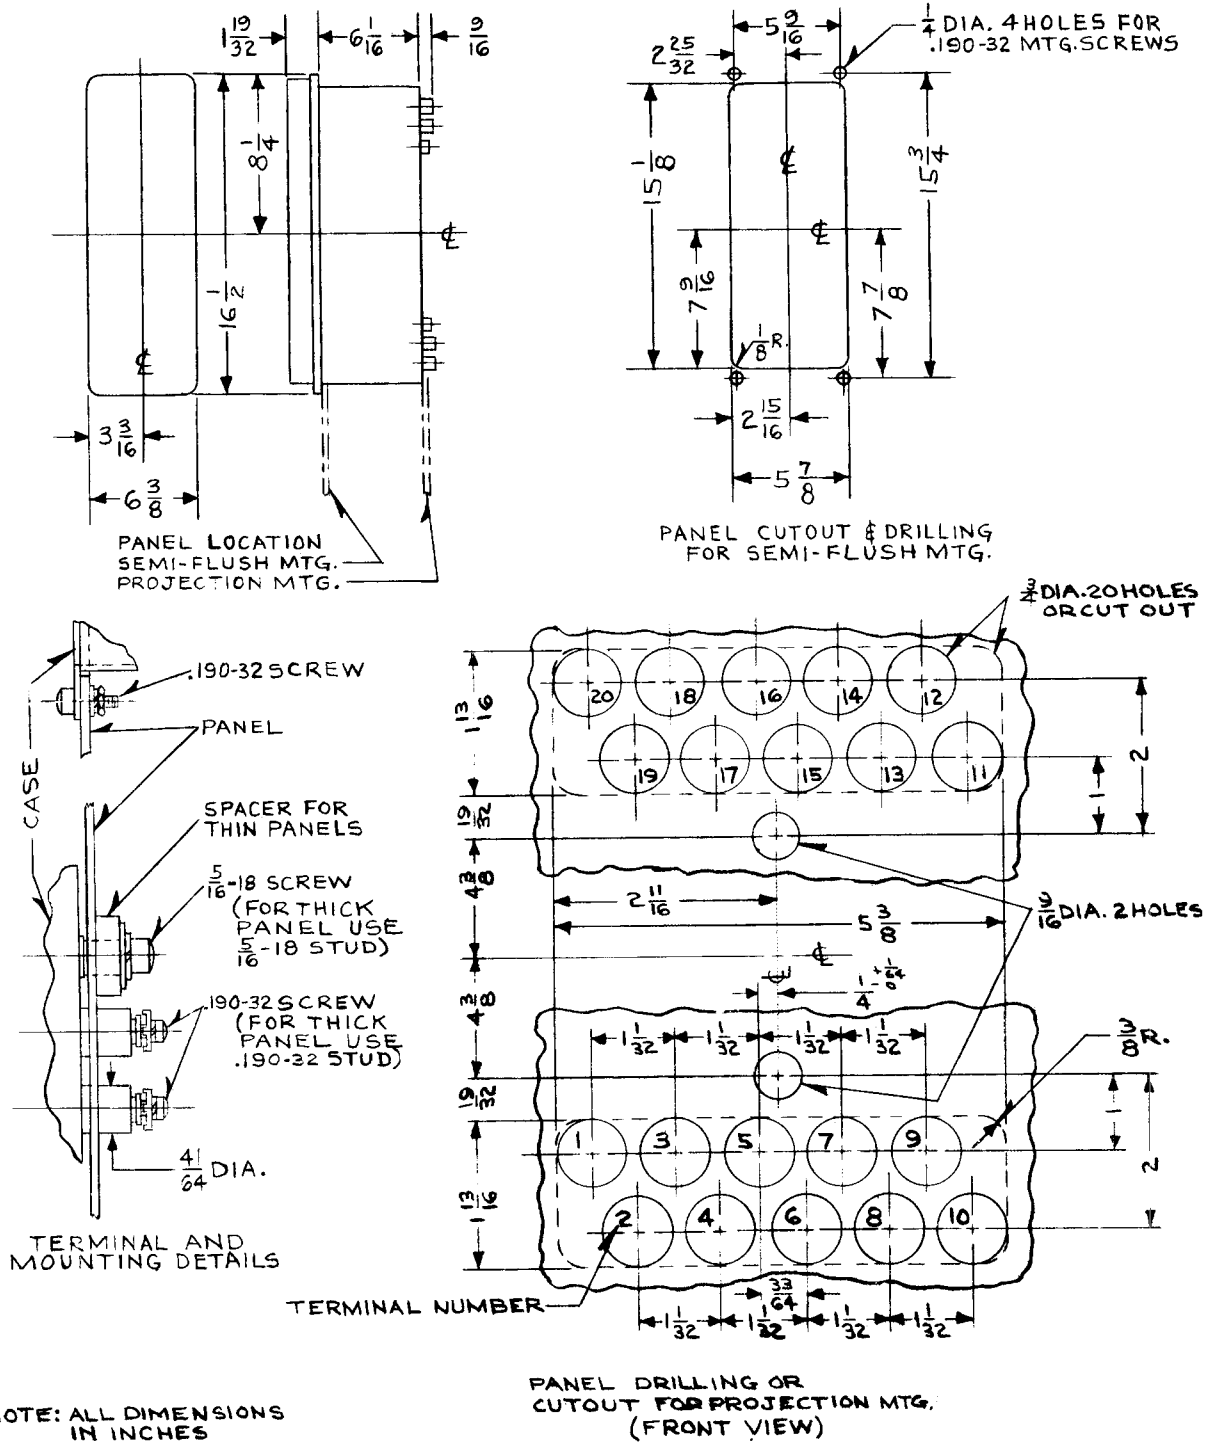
Outline and Drilling Plan for the Type FT21 Case
